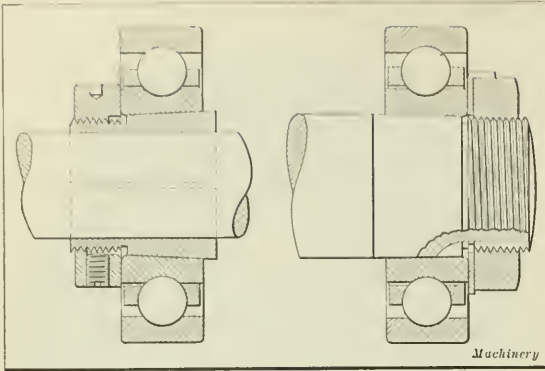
Use of Adapter for mounting Bearings on Shafts that must remain Cylindrical
